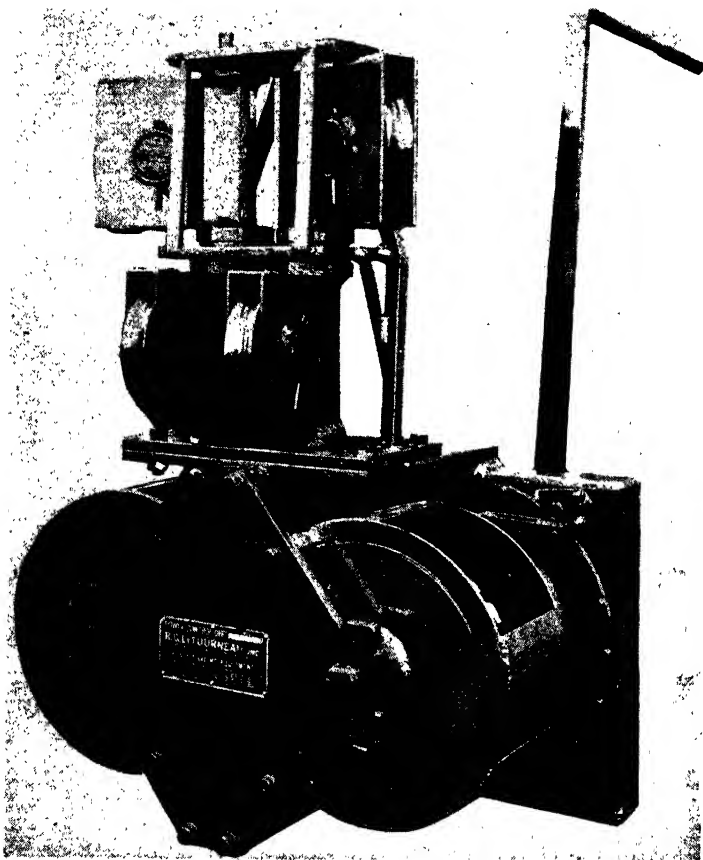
A close-up to show the arc-welded construction of the cable-actuating power-control unit shown on the tractor in Fig. 118. All the welds on this unit were specified by complete engineering control and visually inspected to meet the required specifications. Heavy impact and high-tension loads are all in the day's work for these welds. (*Courtesy of R. G. LeTourneau, Inc.*)
